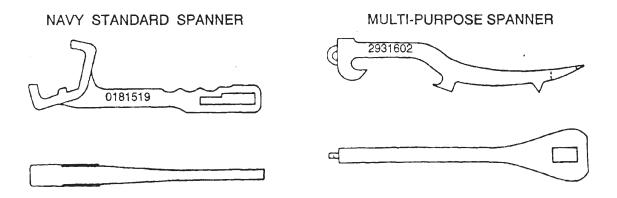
Navy Standard and Multi-Purpose Spanner Wrenches
